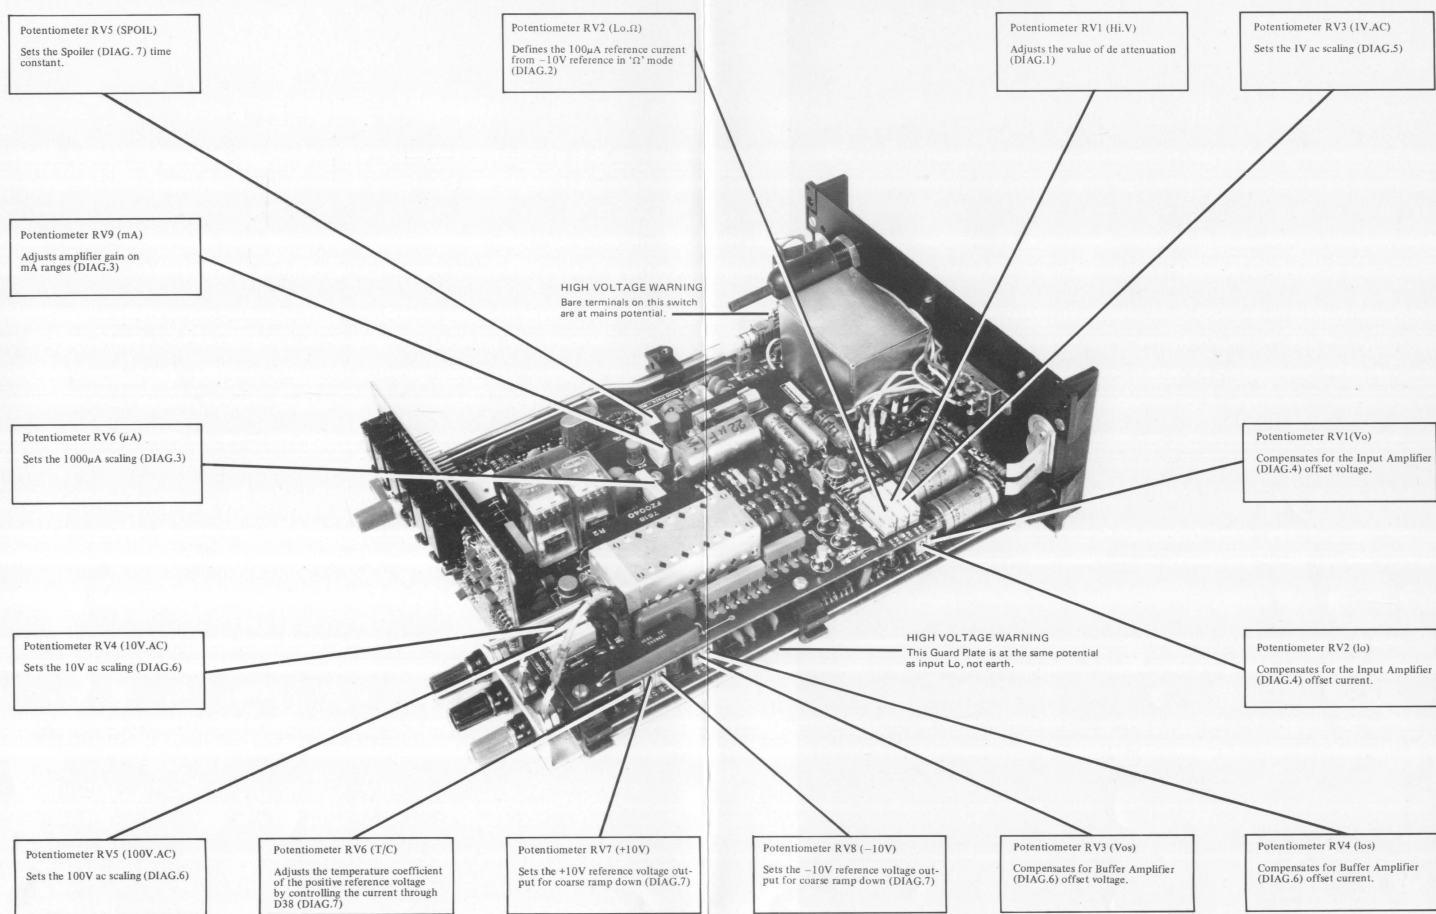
View of PCB Assembly, identifying the Potentiometers and their Functions.
